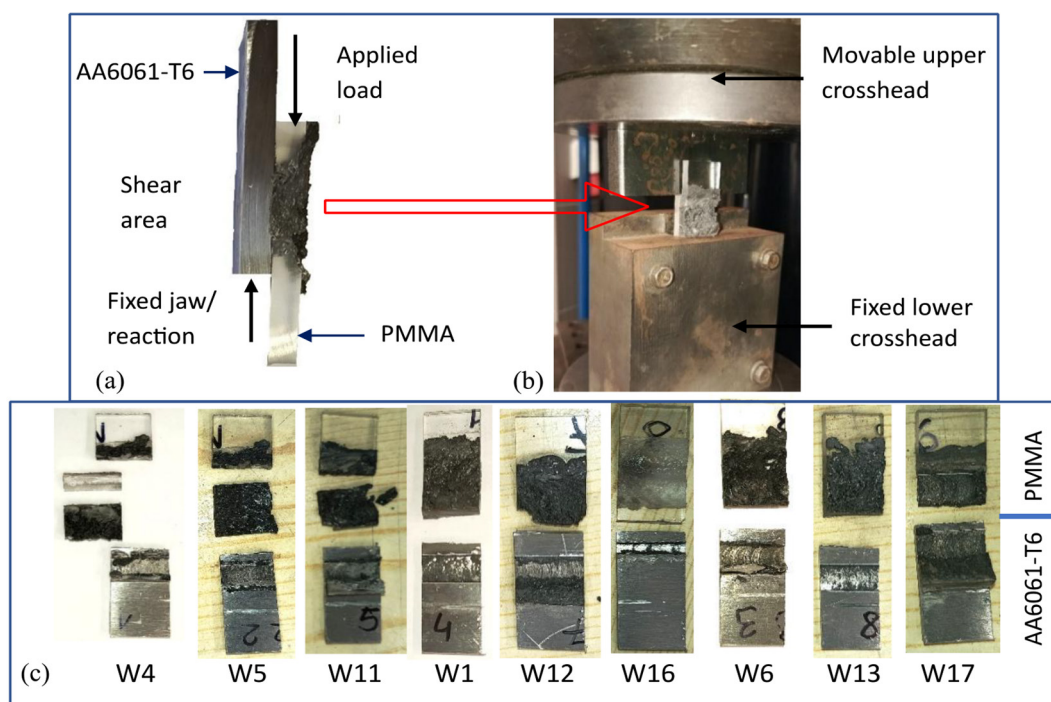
Lap shear testing of FSW joints: (a) prepared sample for shear testing, (b) experimental setup in the universal testing machine, (c) fractured specimens of selected joints
